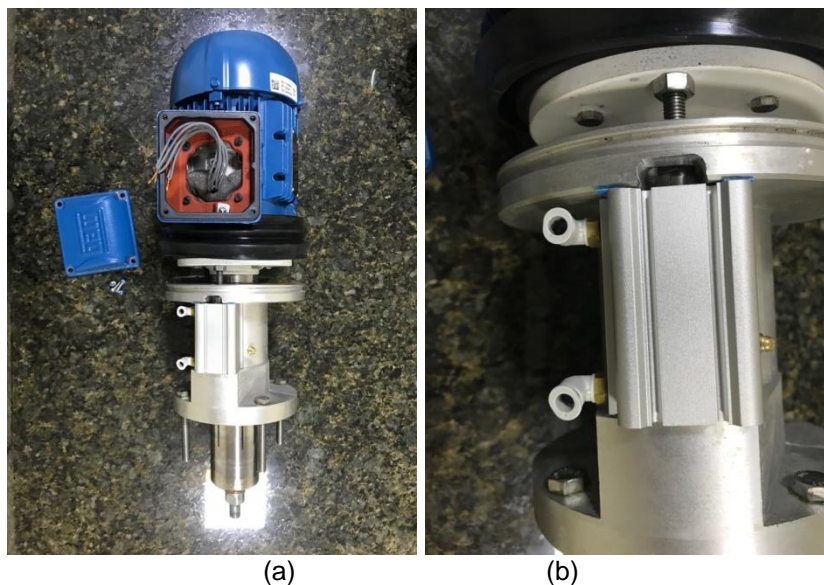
(a) 1.5cv three-phase motor; (b) Pneumatic piston.
